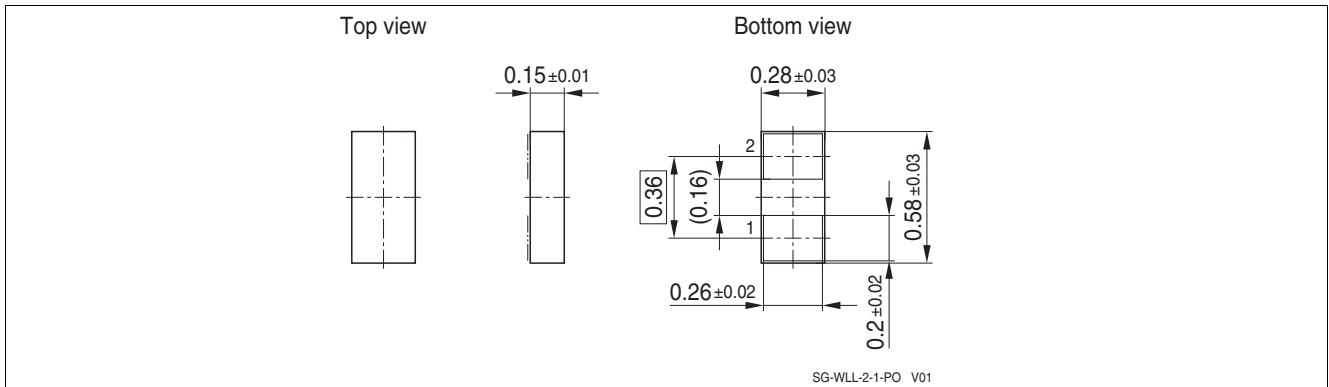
WLL-2-1 Package outline (dimension in mm)
